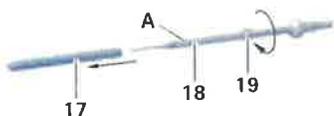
Disassembling the S<sup>4</sup>C screw tap
